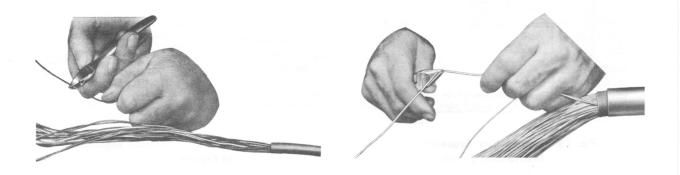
Skinning Conductors of Inside Wiring Cable
